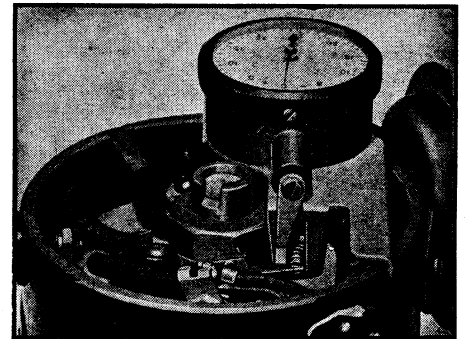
Dial indicator for measuring contact point opening on Delco-Remy distributor. A similar device is available for Auto-Lite distributors
